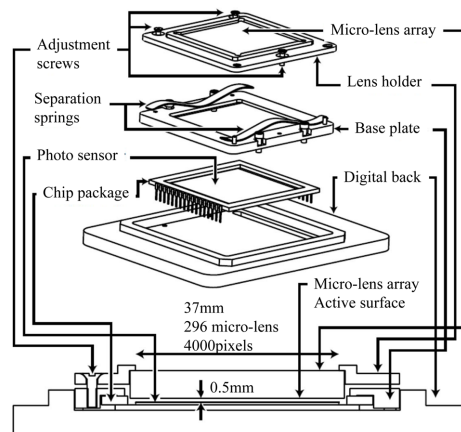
View of assembly for attaching the micro-lens array & Cross-section through assembled parts⁽⁴⁸⁾
